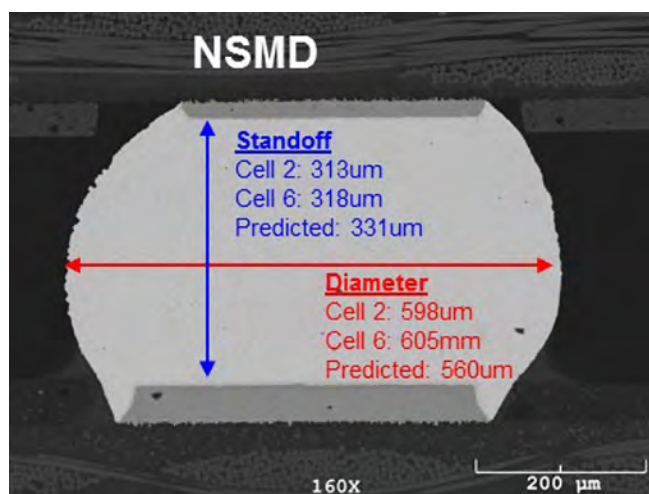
Cross-section of typical NSMD solder joint after mounting to PCB.
